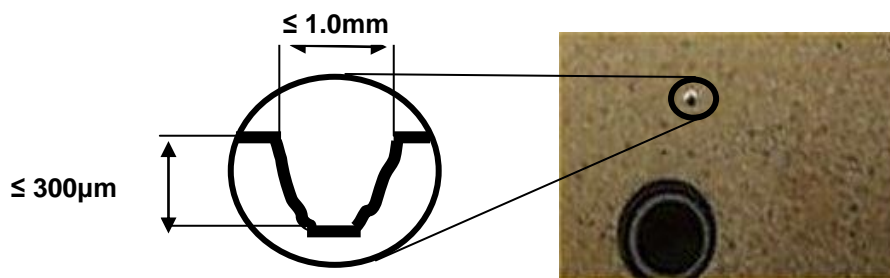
Etching hole (hole down to substrate level) in the MiniSKiiP® bottom surface
